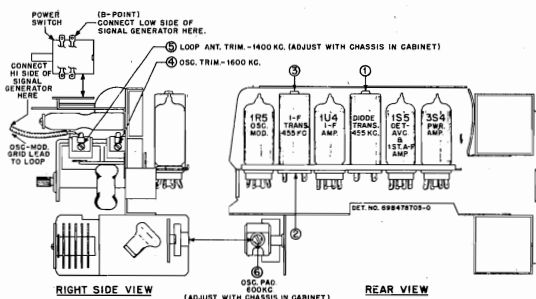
CHASSIS HS-82 TUBE & TRIMMER LOCATIONS
